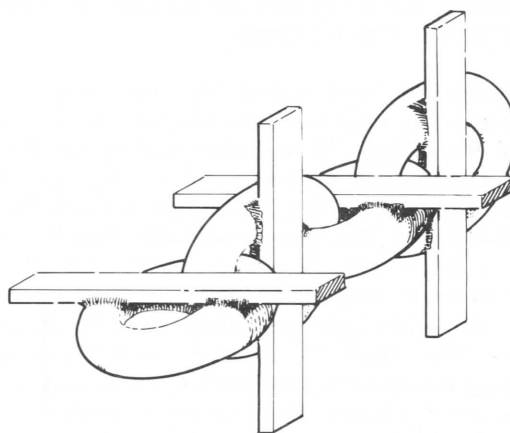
Typical section of modified chain with welded steel crossbars.
